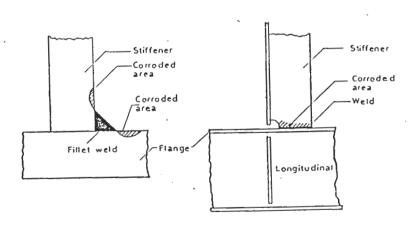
Corroded Areas in a Stiffener - Longitudinal Connection
